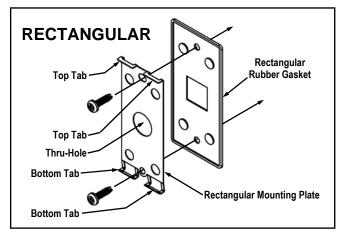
A: "RECTANGULAR PROXIMITY READER MOUNTING COMPONENTS
